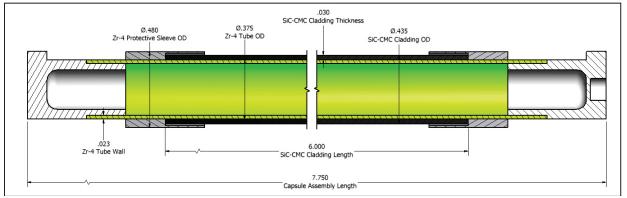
Geometry of the LWRS capsule assembly design for the Si-CMC hybrid Zr-4 cladding rodlet (Ref. 1).
